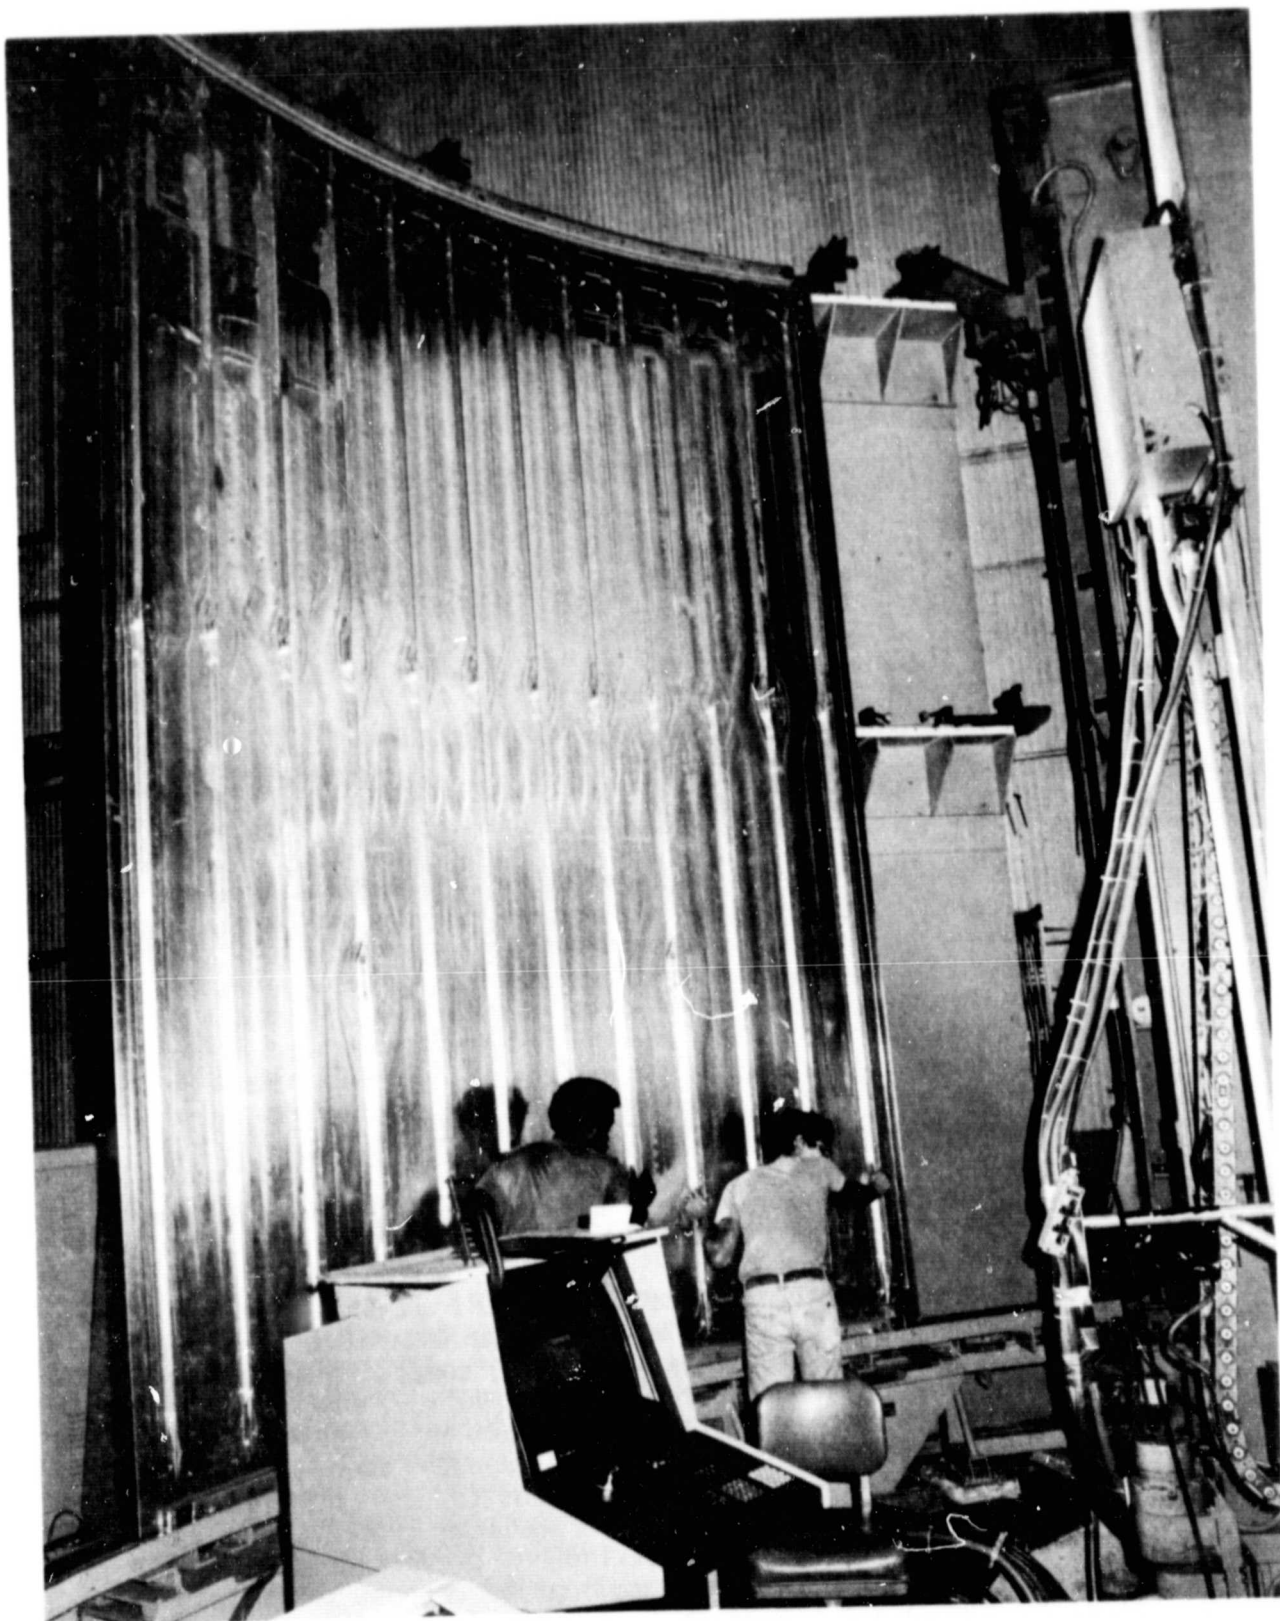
VPPA Welding of LH₂ Barrel from Scrap Parts.
